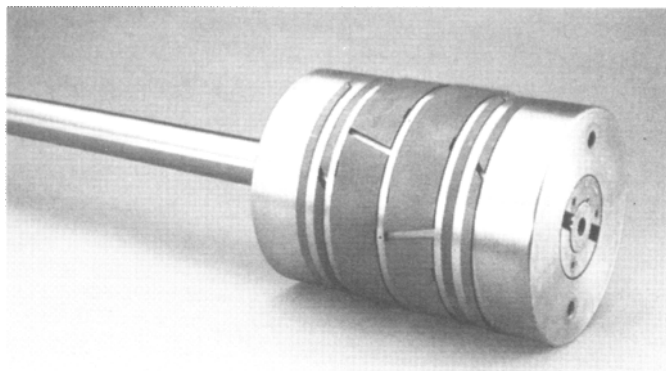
Pistons and rings. Lubricated and nonlubricated pistons with PTFE or other composite materials for the piston and rider rings. These designs prevent piston-to-bore contact and provide reliable service life, particularly during possible periods of lubrication interruption. (Used by permission: Bul. 85084, ©1992. Dresser-Rand Company.)
